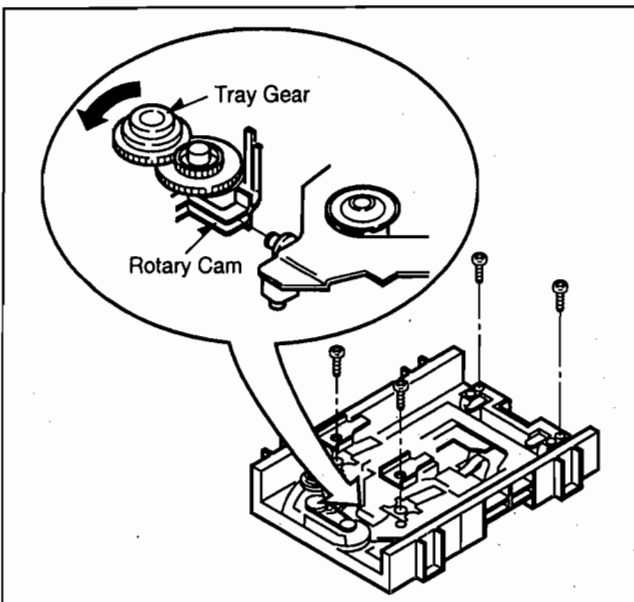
Setting of the Traverse Unit and the Rotary Cam
